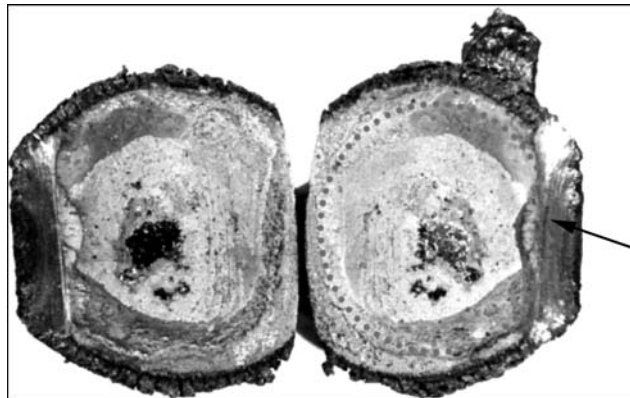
Appearance of the rod end faces with characteristic formation of the welded joint along the external edges (shown by an arrow)
